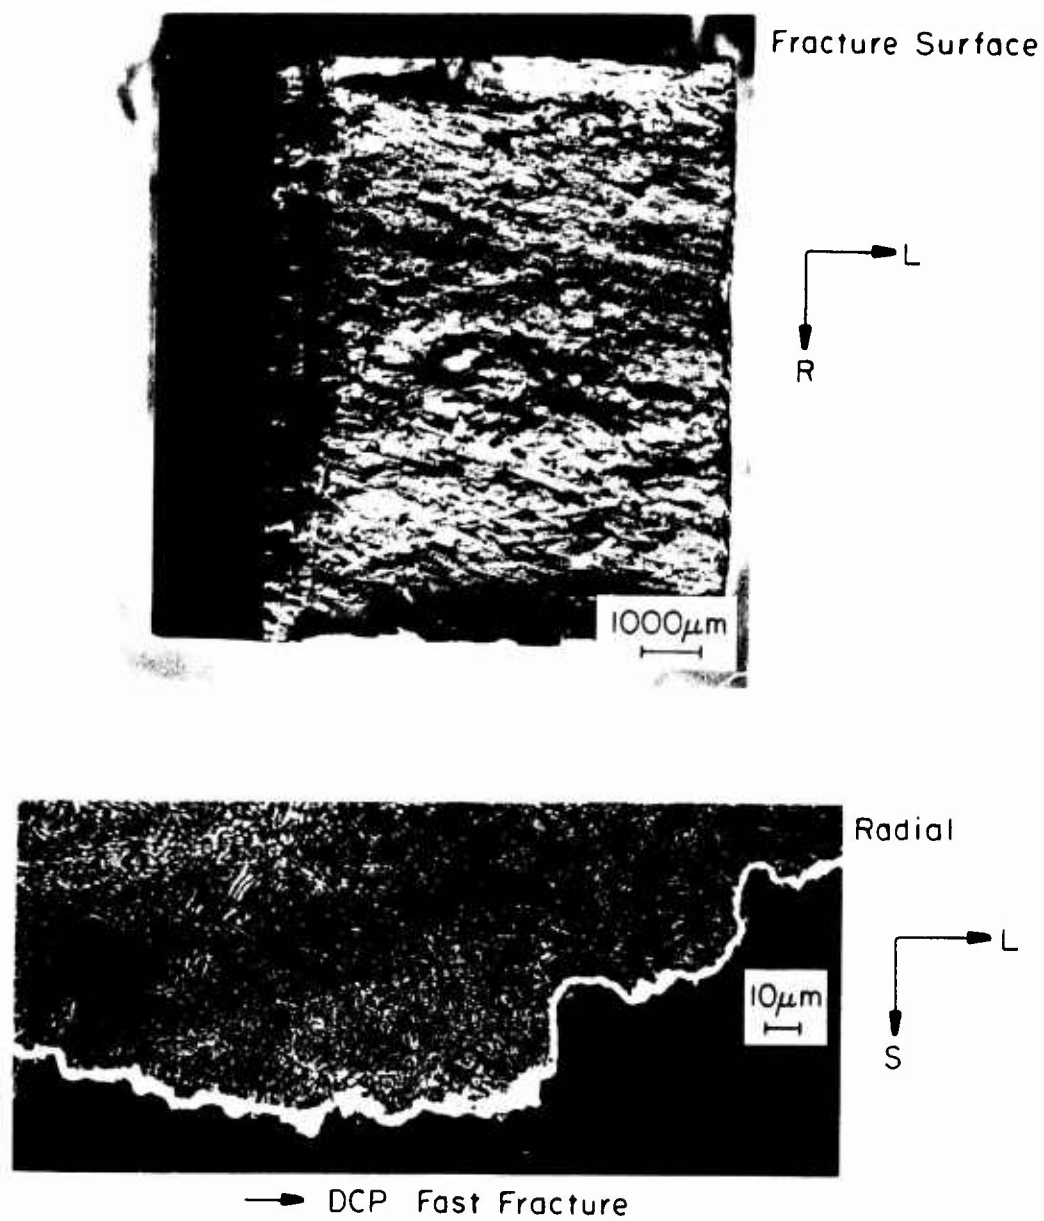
Alloy 253, sample 3SLE2. Fracture surface X8, crack path X500.
